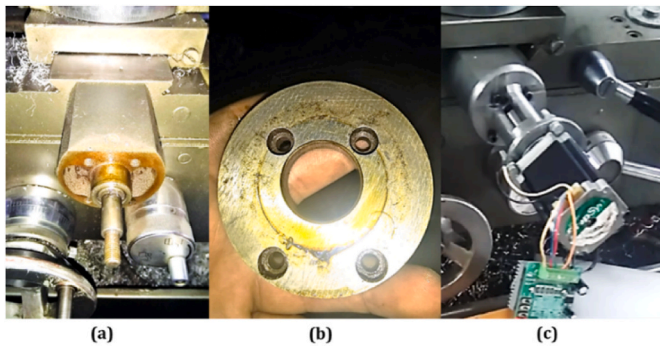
(a) Knob detached from the cross slide assembly. (b) Reading flange for the correct design of jig. (c) Motor hanged with the cross slide assembly and shaft of motor coupled with the lead screw of cross slide.
